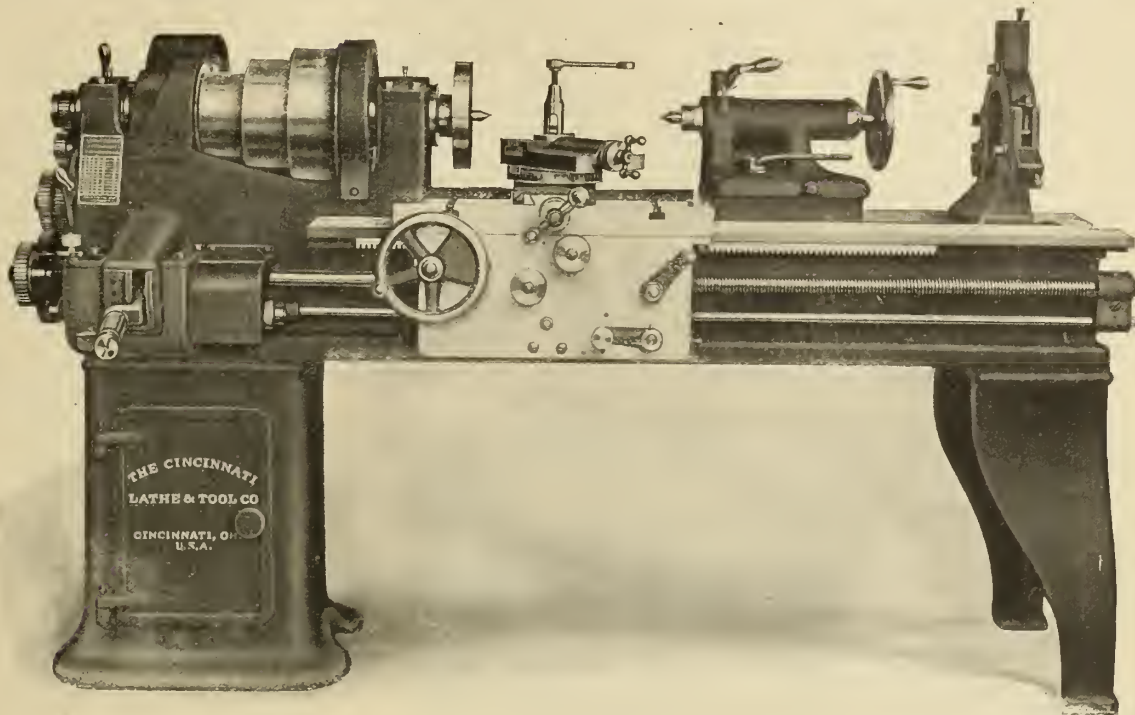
Cincinnati Lathe Fitted With New Positive Geared Feed Device.
